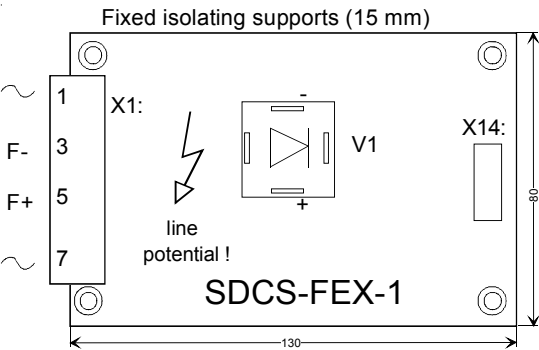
/1 Layout of the SDCS-FEX-1 field exciter board
